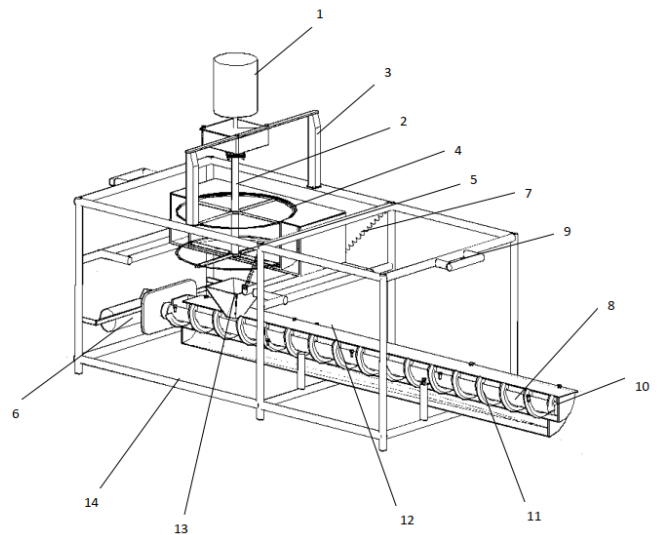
Isometric view of the Mono-bloc Mixer Extruder Machine. 1-DC motor, 2-mixer shaft, 3-supporting stand, 4-mixing chamber, 5-mixing blade, 6-DC motor, 7-spring, 8-helical threaded shaft, 9-handle, 10-extruder shaft housing, 11-thread, 12-bolt, 13-hopper, 14-supporting frame
